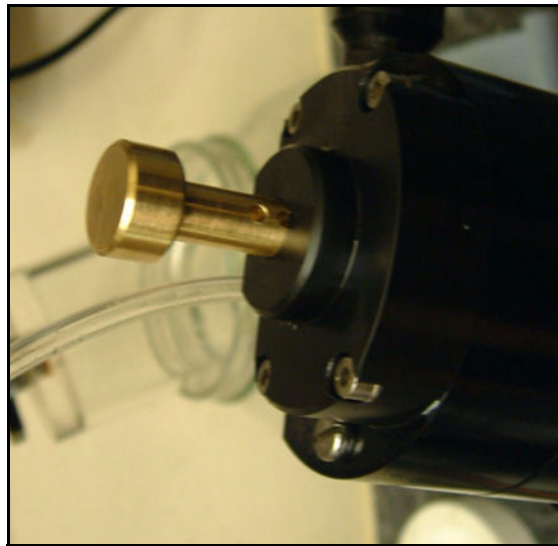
Diaphragm Puller Tool Indication Hole
